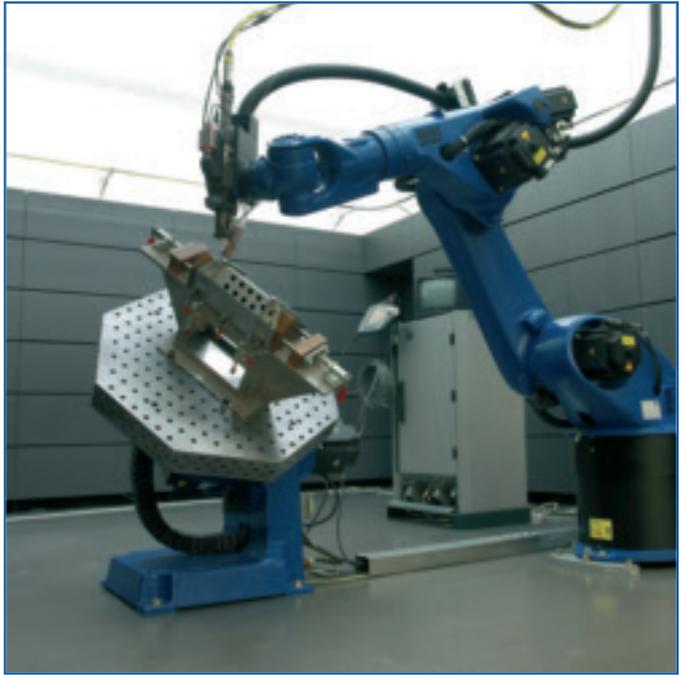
Components of a robotic laser welding cell: welding head with laser optics, process camera and sensors, fixture, positioner, welding cabin and exhaust, and robot.
